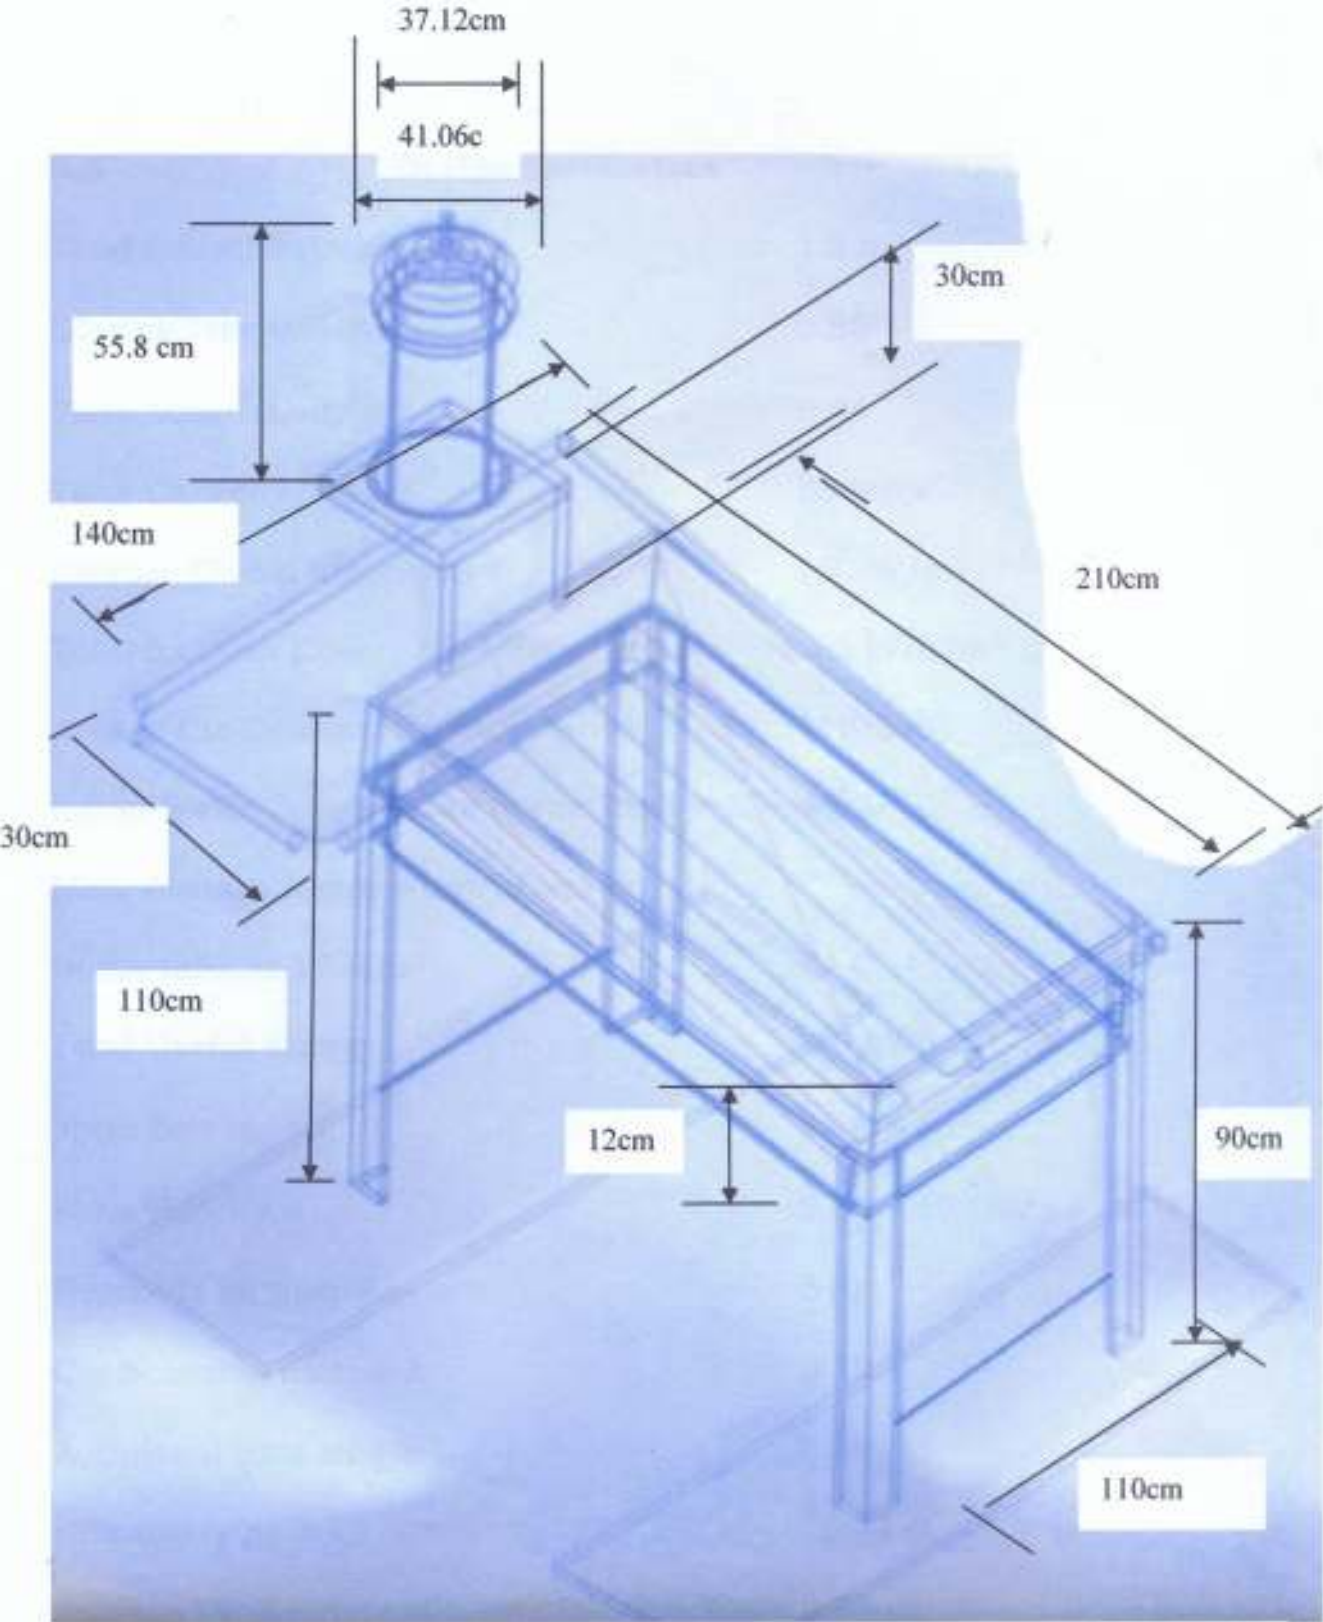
(a) AutoCAD Engineering drawing of the system.
